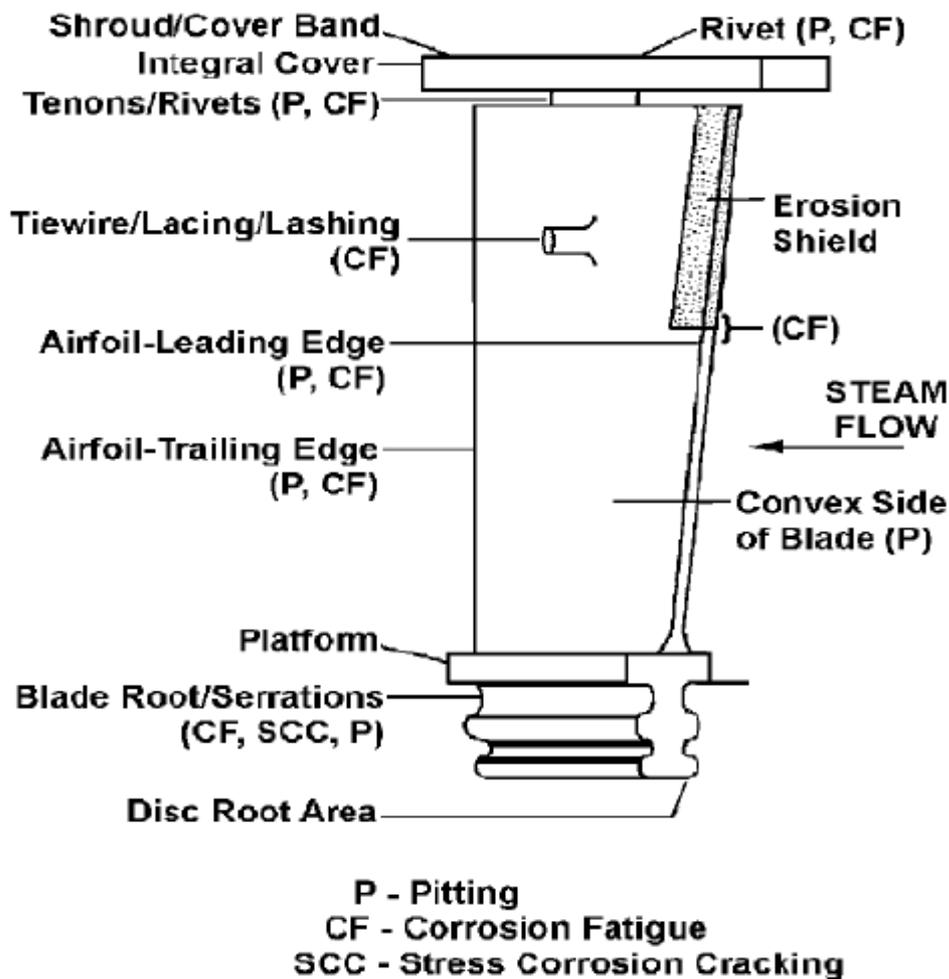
Typical Locations of Cracking and Localized Corrosion on LP Turbine Rotating Blades. There Has Also Been SCC and CF Cracking in the Tiewire Holes.
